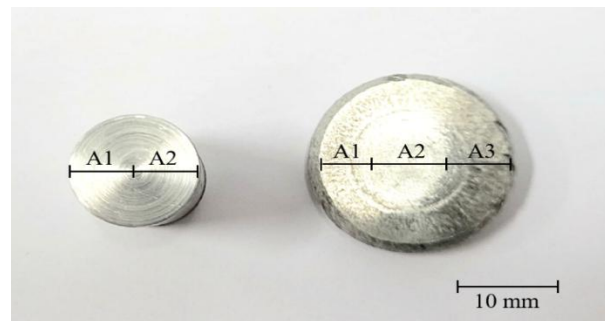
Regions for Measuring Sample Roughness (A) Machined Specimen (Pre-Forging); (B) Forged Specimen).
